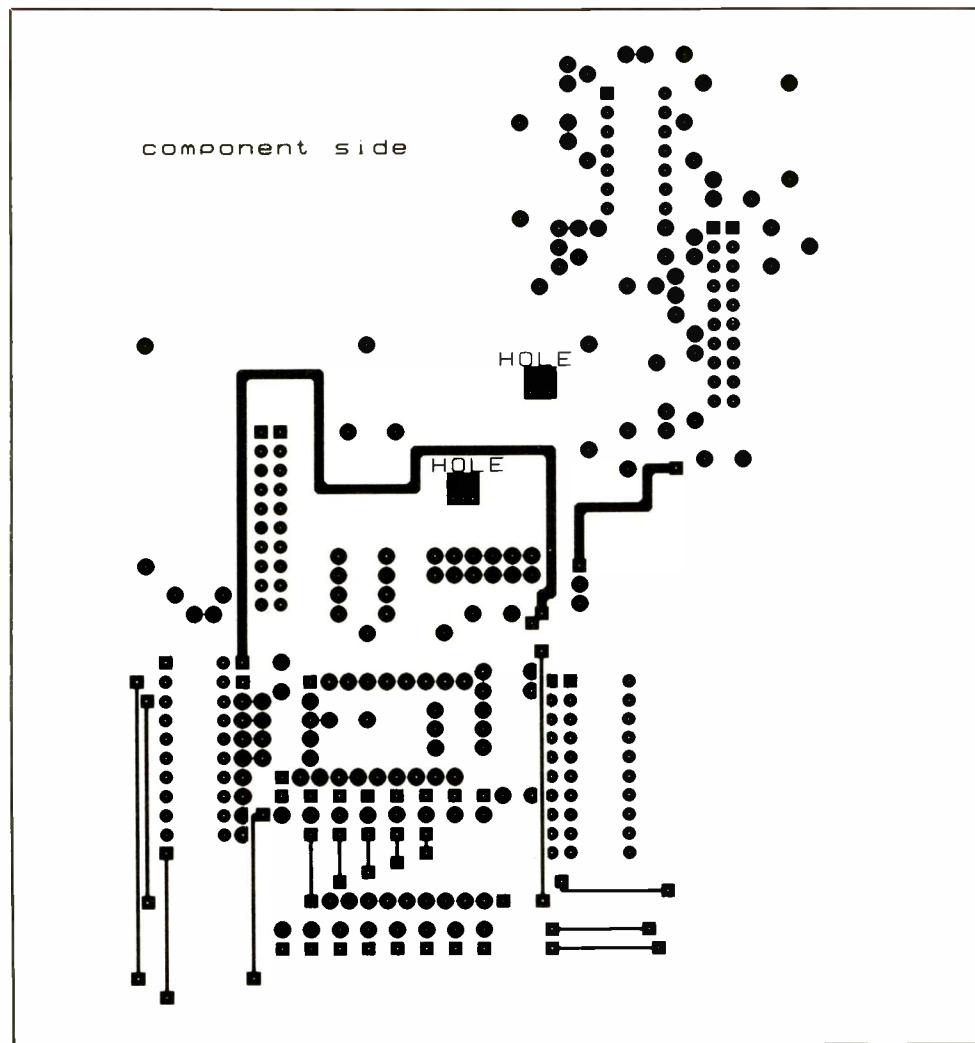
Actual-size etching-and-drilling guides for MAG-11BAT's double-sided printed-circuit board.
